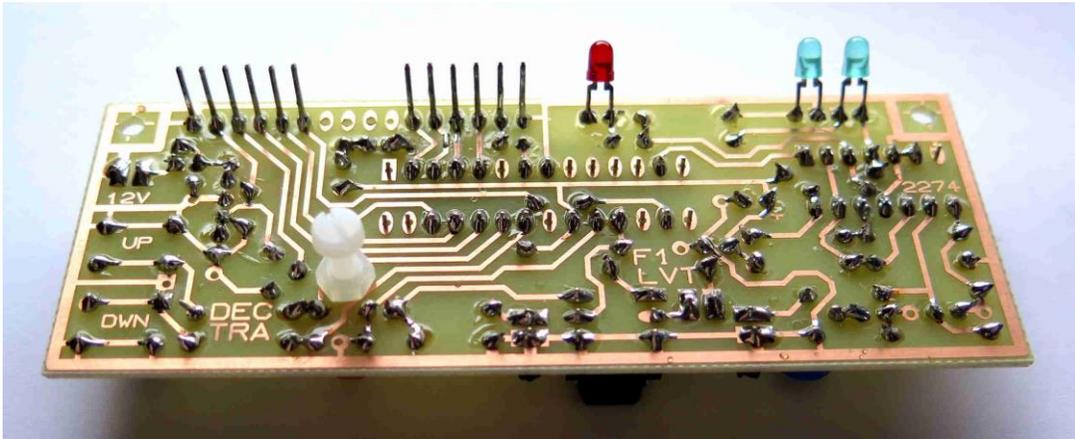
2 6-pin connectors get soldered to the copper side track. We also see the LED 3outwardly inclined and the nylon screws to hold the card parallel to the display
